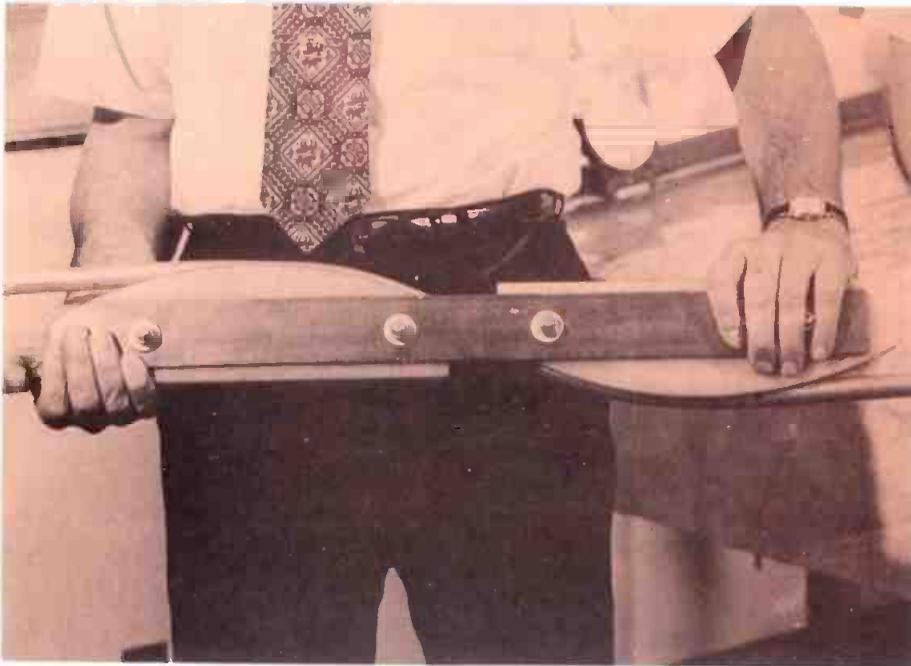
Closeup view of the $\frac{3}{4}$ -inch cable bender.
